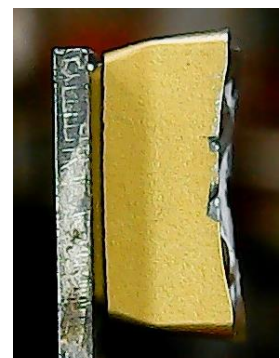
Super Duplex – Tools – LN2 – Drilling.
